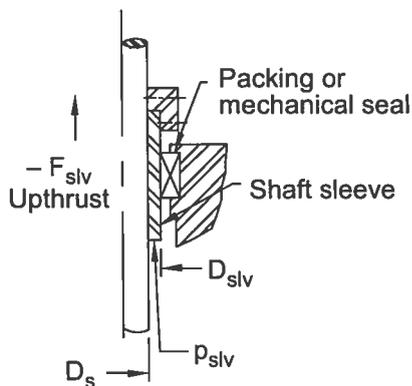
Shaft sleeve through packing or mechanical seal
